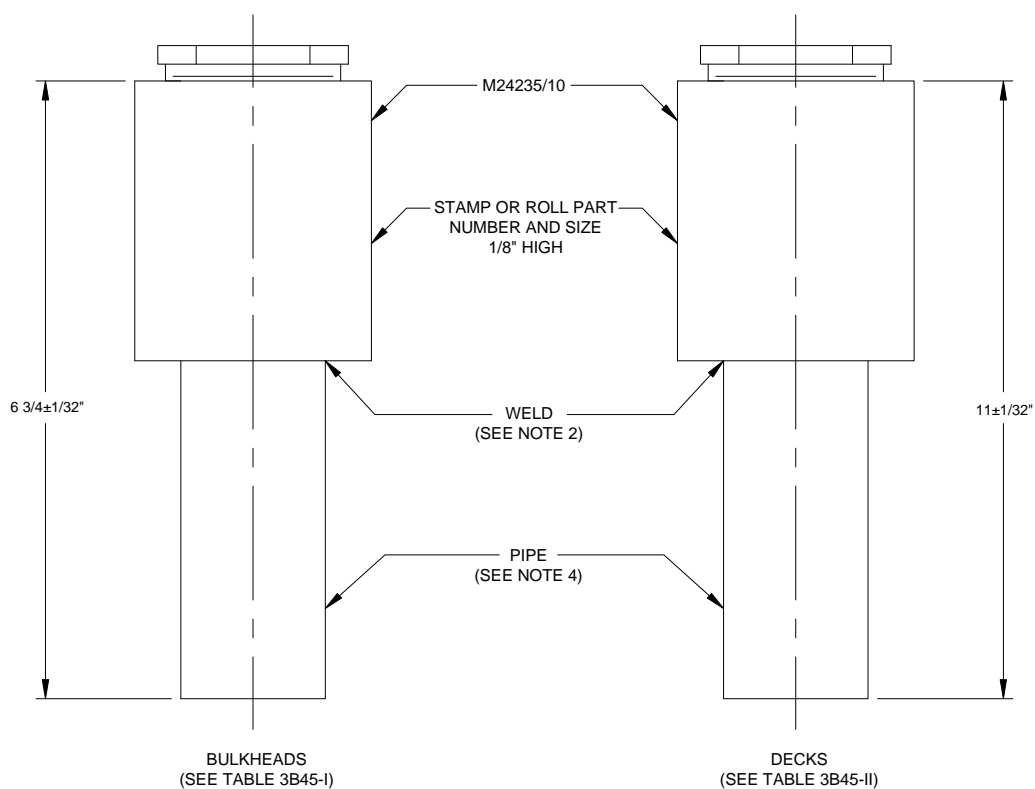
B45. MIL-S-24235/10 stuffing tubes for steel decks and bulkheads with pipe protection (surface ships).
